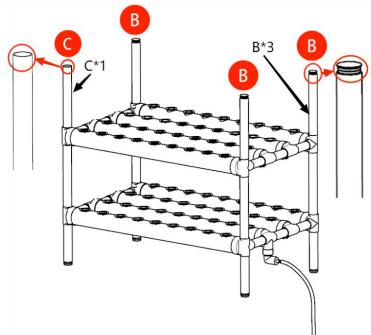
Connect three support tubes with letter B, one support tube with letter C, and the assembly of Figure 6 together according to the diagram. (Note that the support tube without a water plug should be placed in the bottom left corner)
